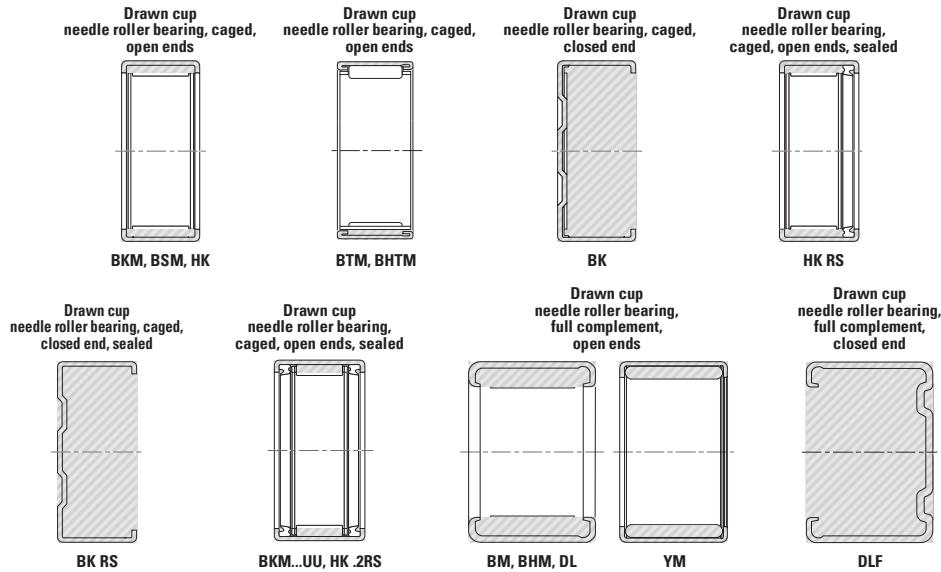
Types of metric series drawn cup needle roller bearings
